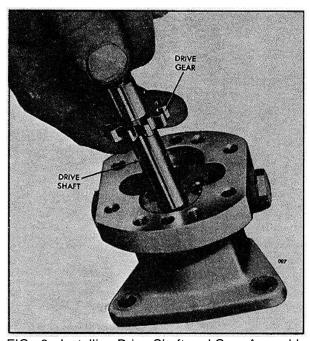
Installing Drive Shaft and Gear AssemblyFIG. 10 Installing Drive Shaft and Gear Assembly
